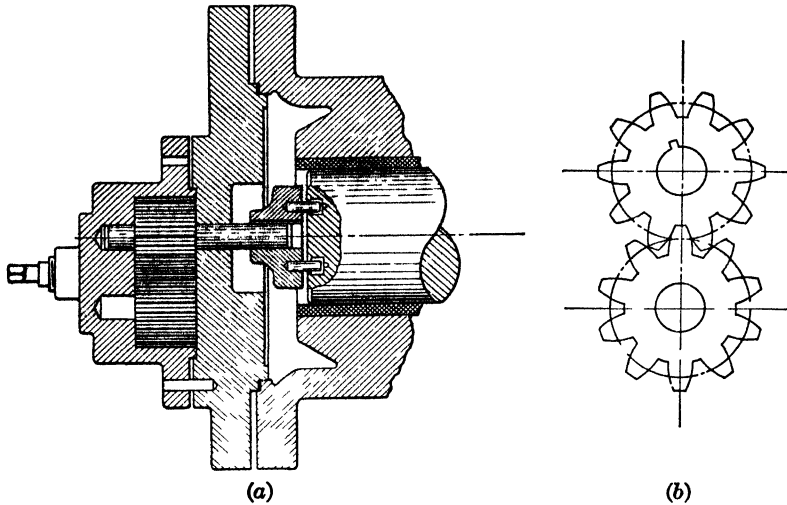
·17. The gear type of oil pump, direct-connected to the compressor shaft.
